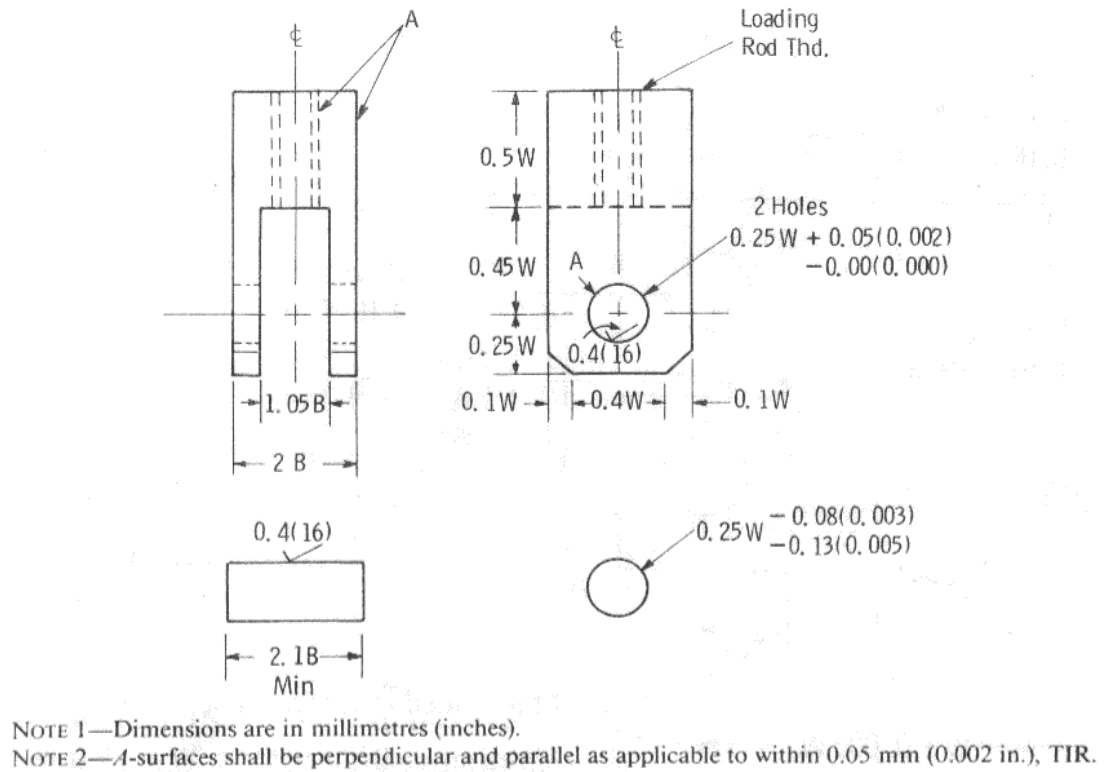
Clevis and Pin Assembly for Gripping C(T) Specimen [8]
